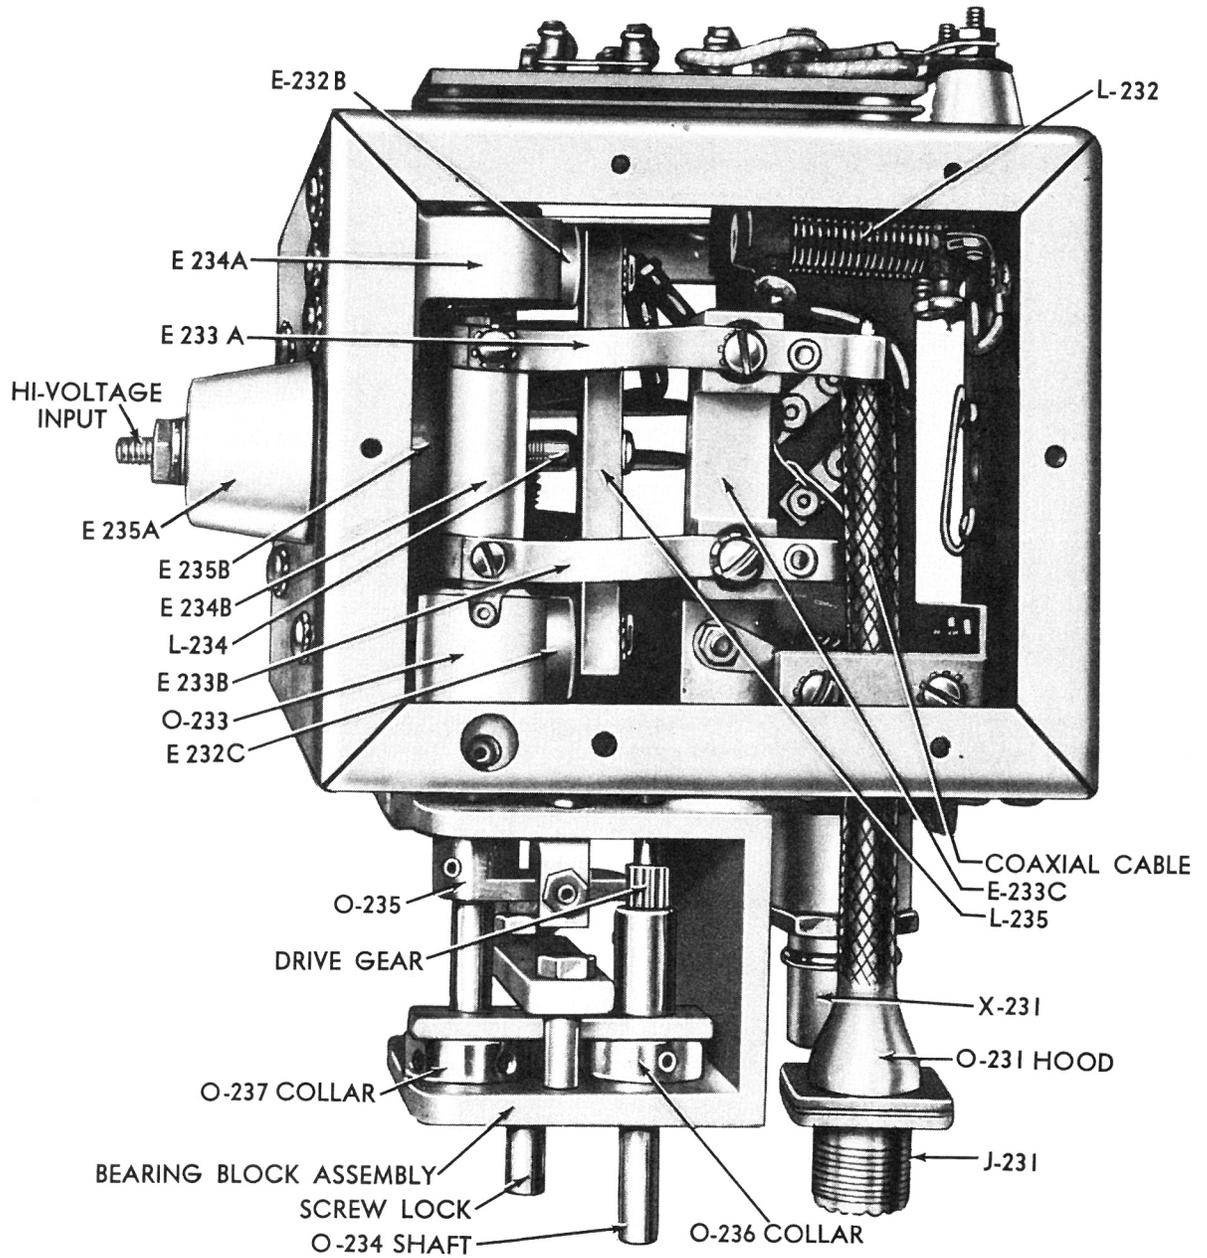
Transmitter R-F Oscillator Navy Type CFN-52ACQ Bottom View
